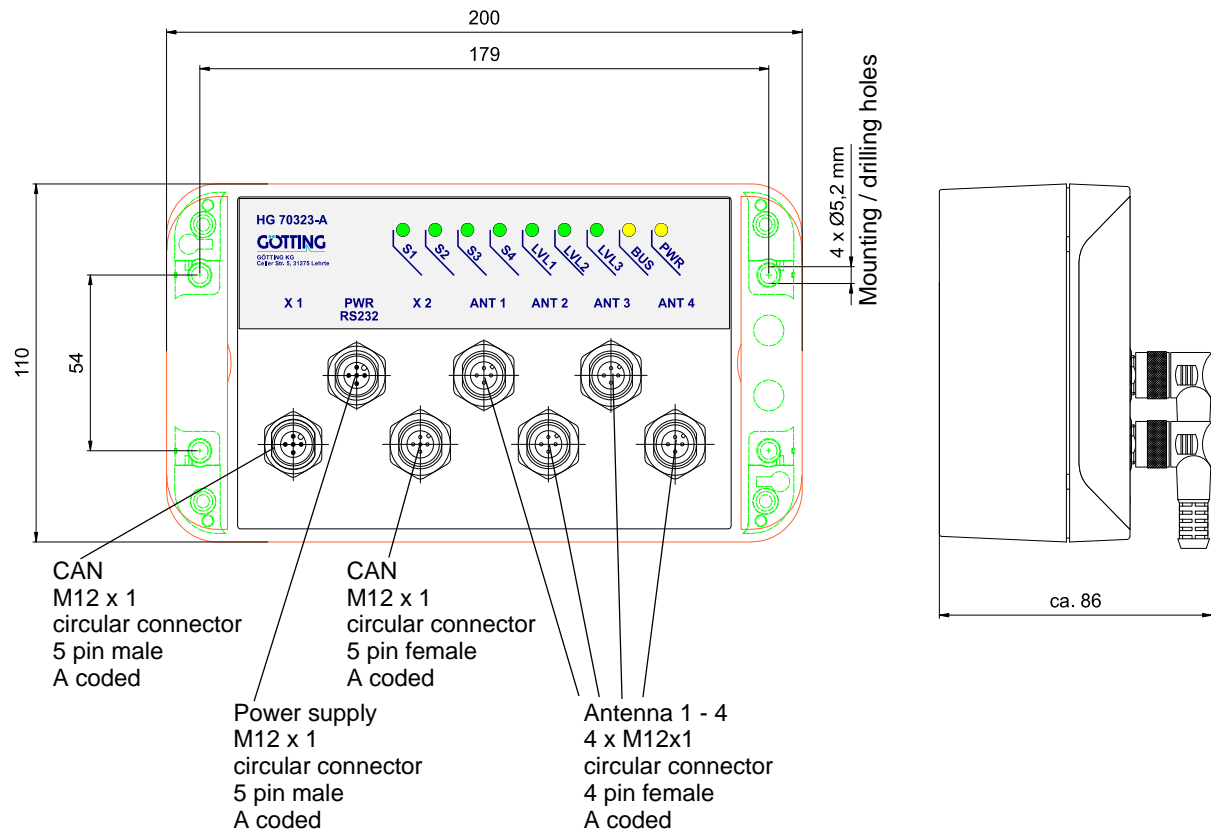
Dimensions HG 70323YA/ZA (Profibus)
